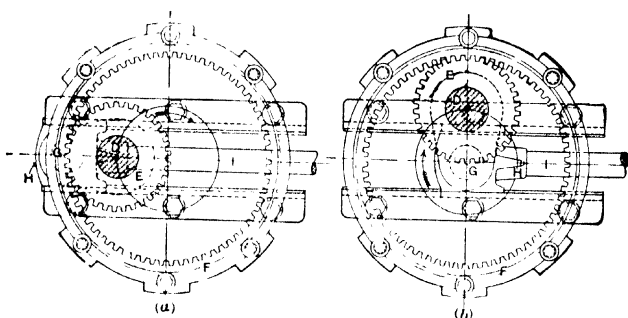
Pneumatic Coal Puncher Diagram of Gearing.
